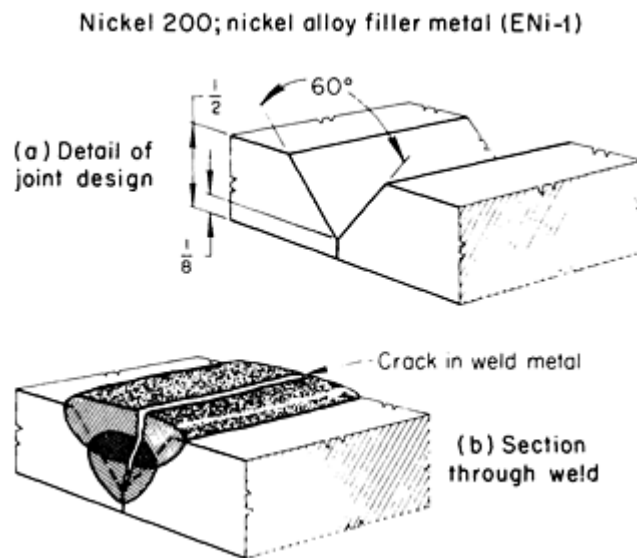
JOINT CONFIGURATIONS FOR WELDING 13 MM ($\frac{1}{2}$ IN.) NICKEL 200 AND SUBSEQUENT CRACK IN WELD METAL CAUSED BY EXCESSIVE HEAT INPUT. DIMENSIONS GIVEN IN INCHES
